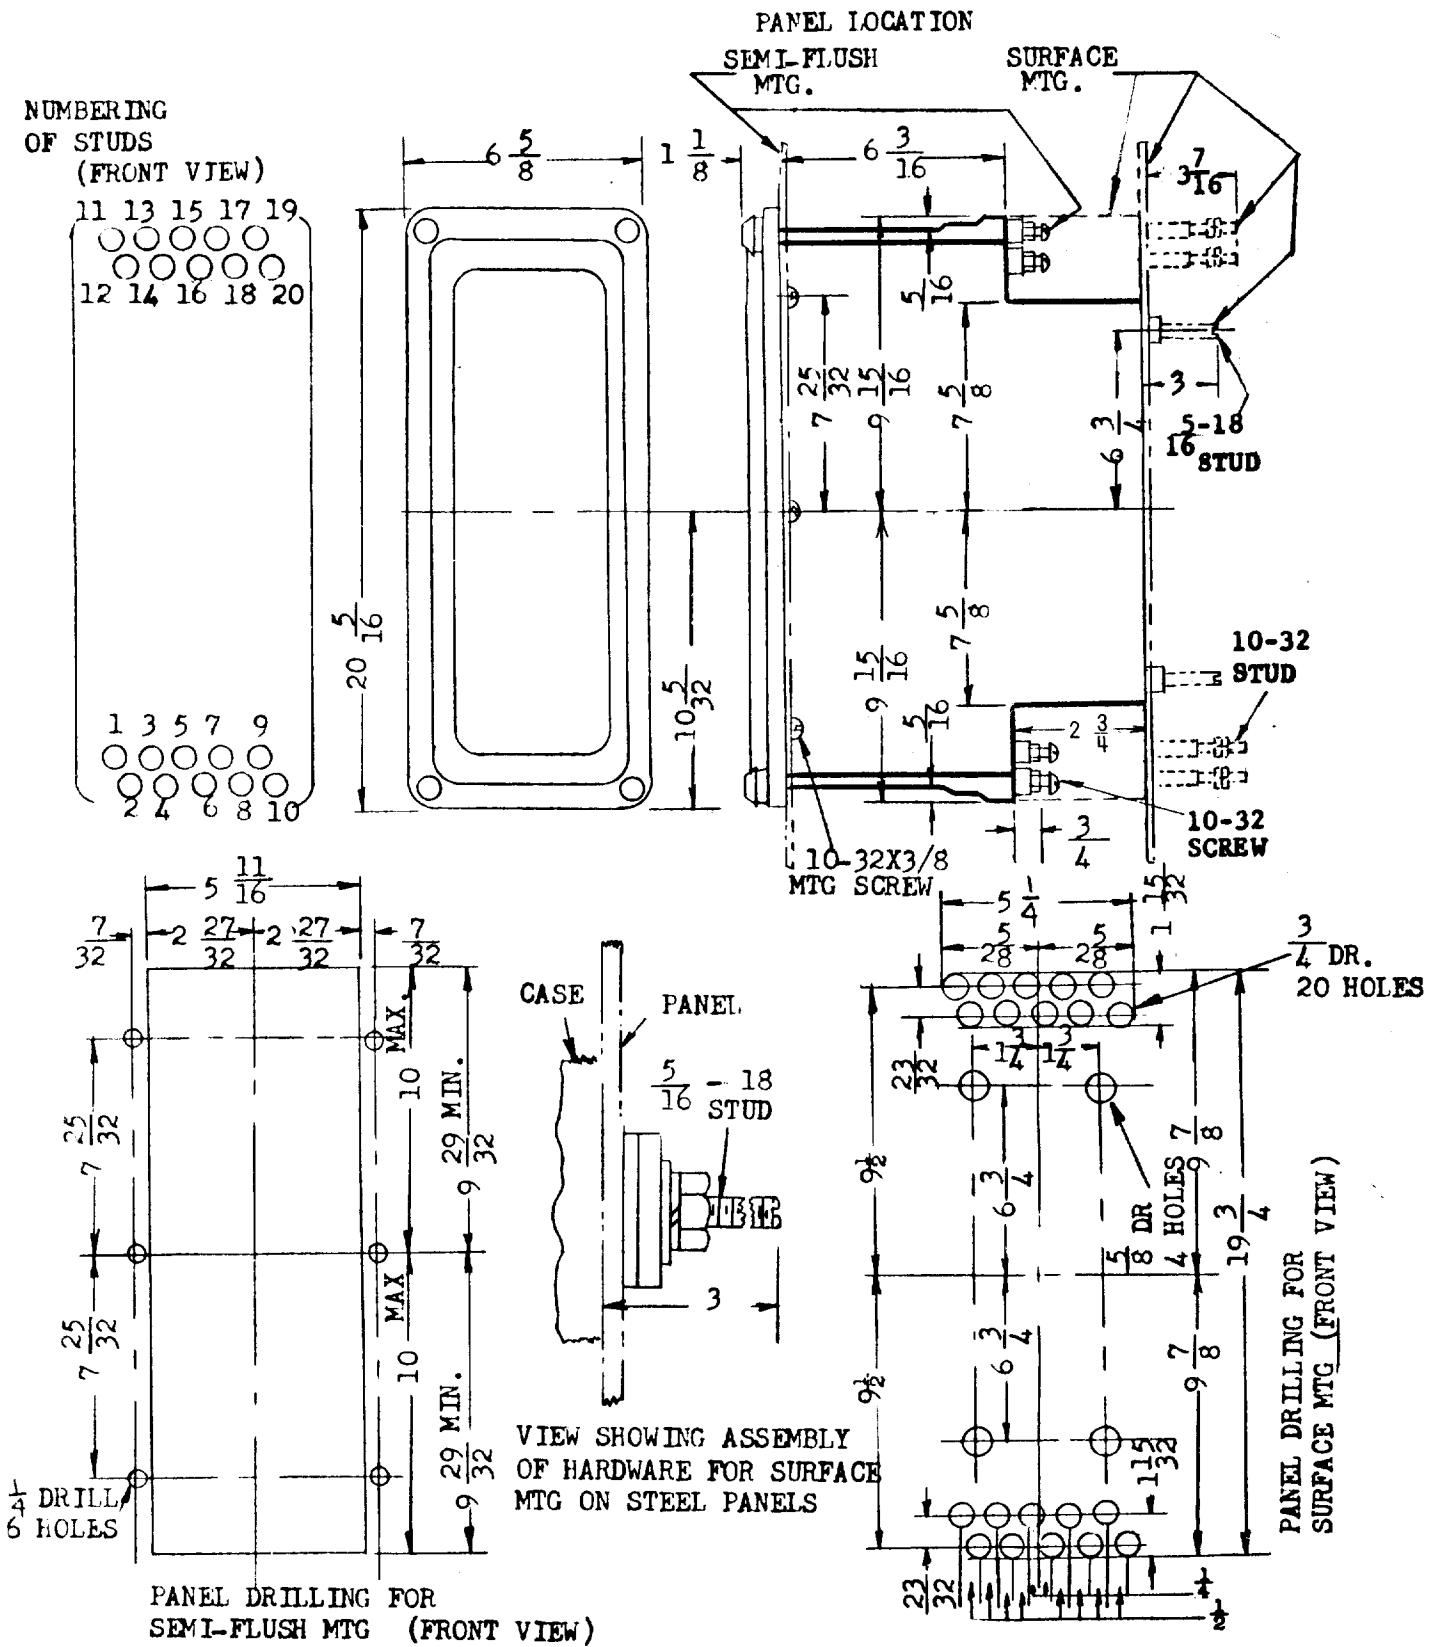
(0178A7336-2) Outline And Panel Drilling Dimensions For The Large, Double Ended, Deep (L2D) Case Of The STD29C Relay
